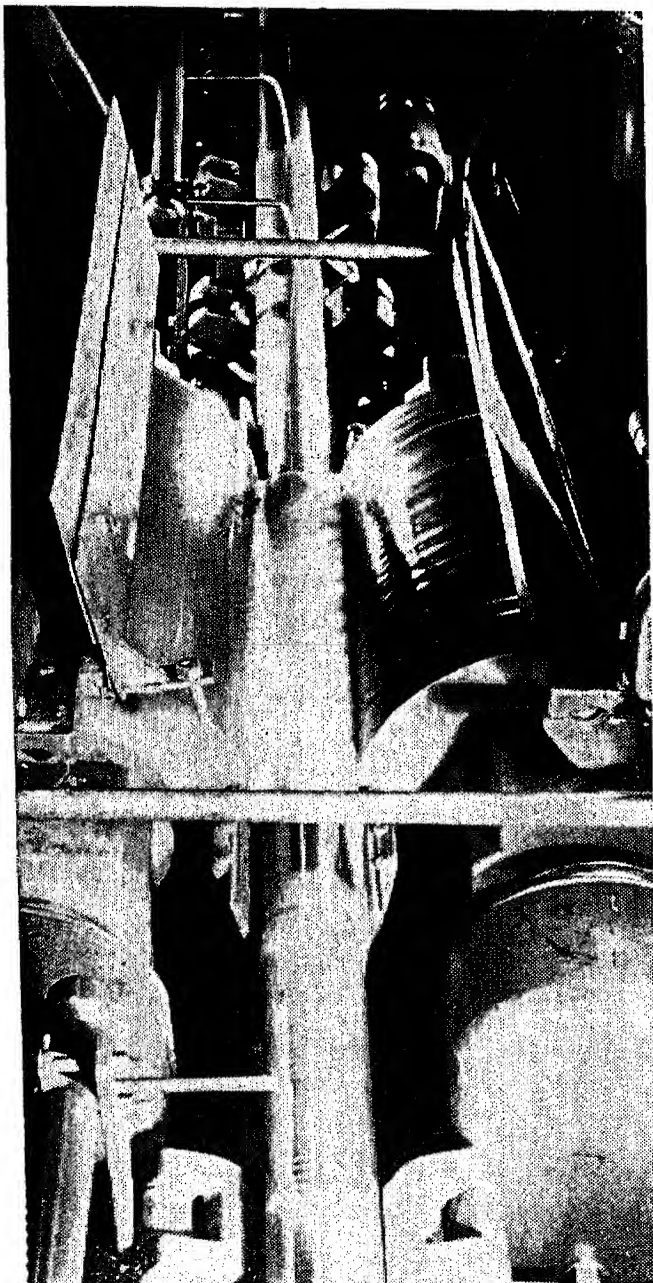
A view of work passing between the wheels of a centerless lapping machine. (Courtesy Cincinnati Grinders, Inc.)
